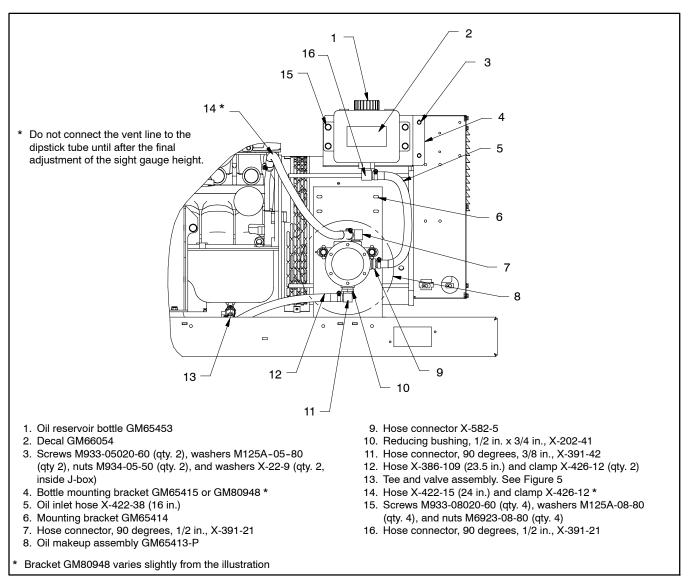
Oil Makeup Kit GM65412-KP2 and -KP3 Components
